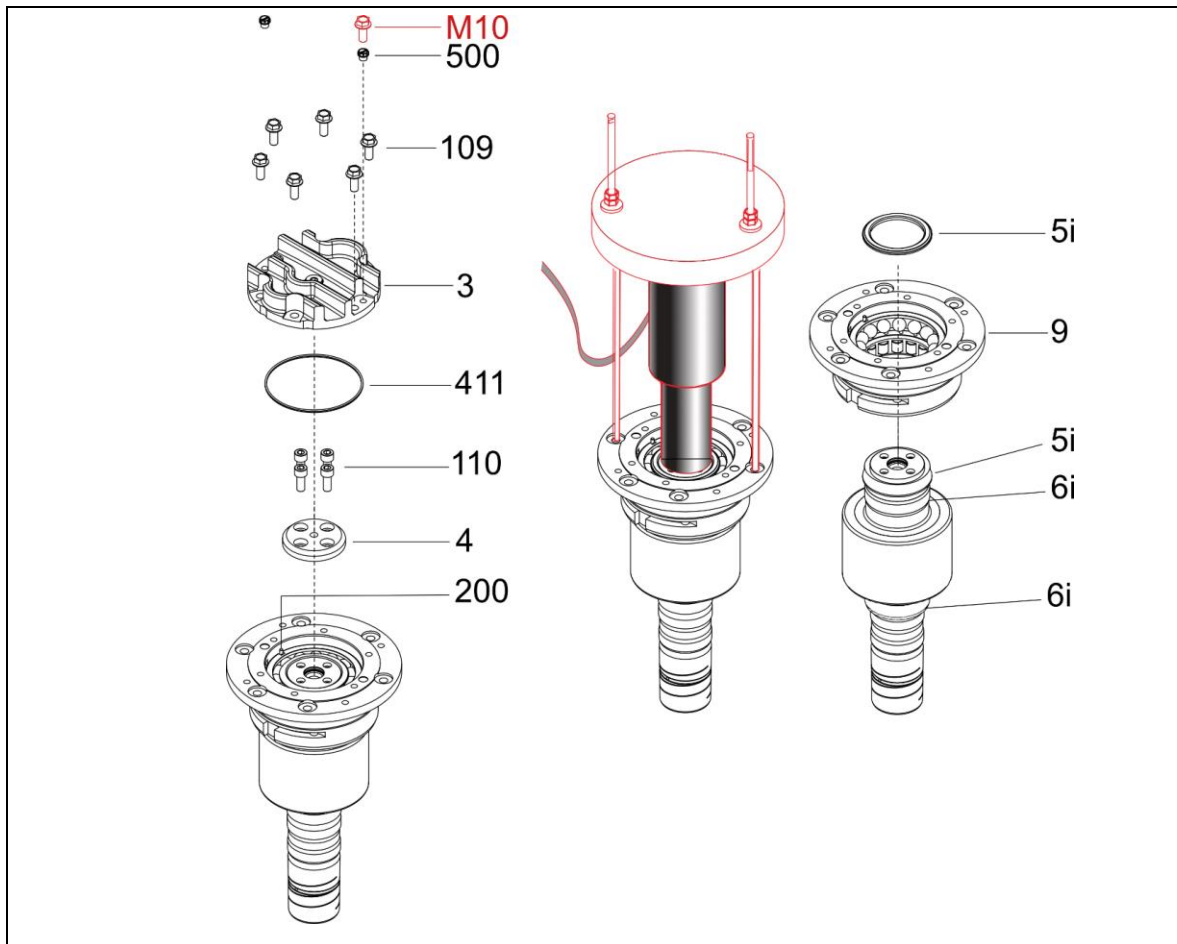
Removing bearing cover and bearing cartridge HS-WS
